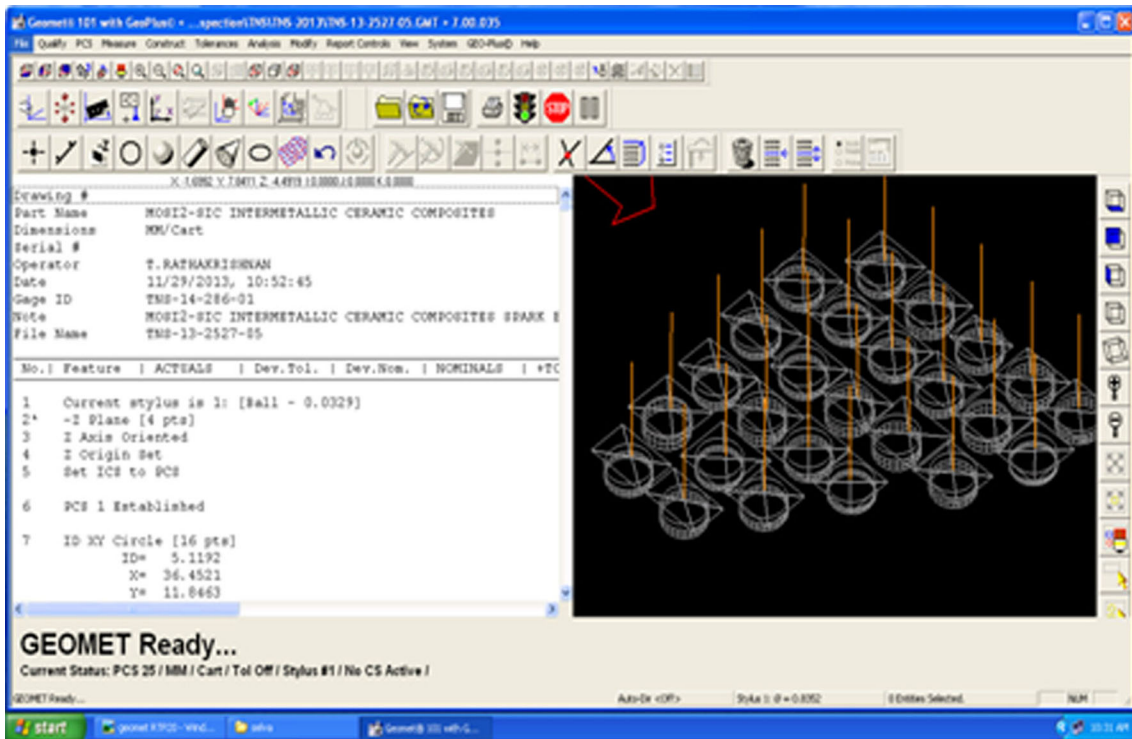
GEOMET universal CMM software is used to measure geometrical tolerance
